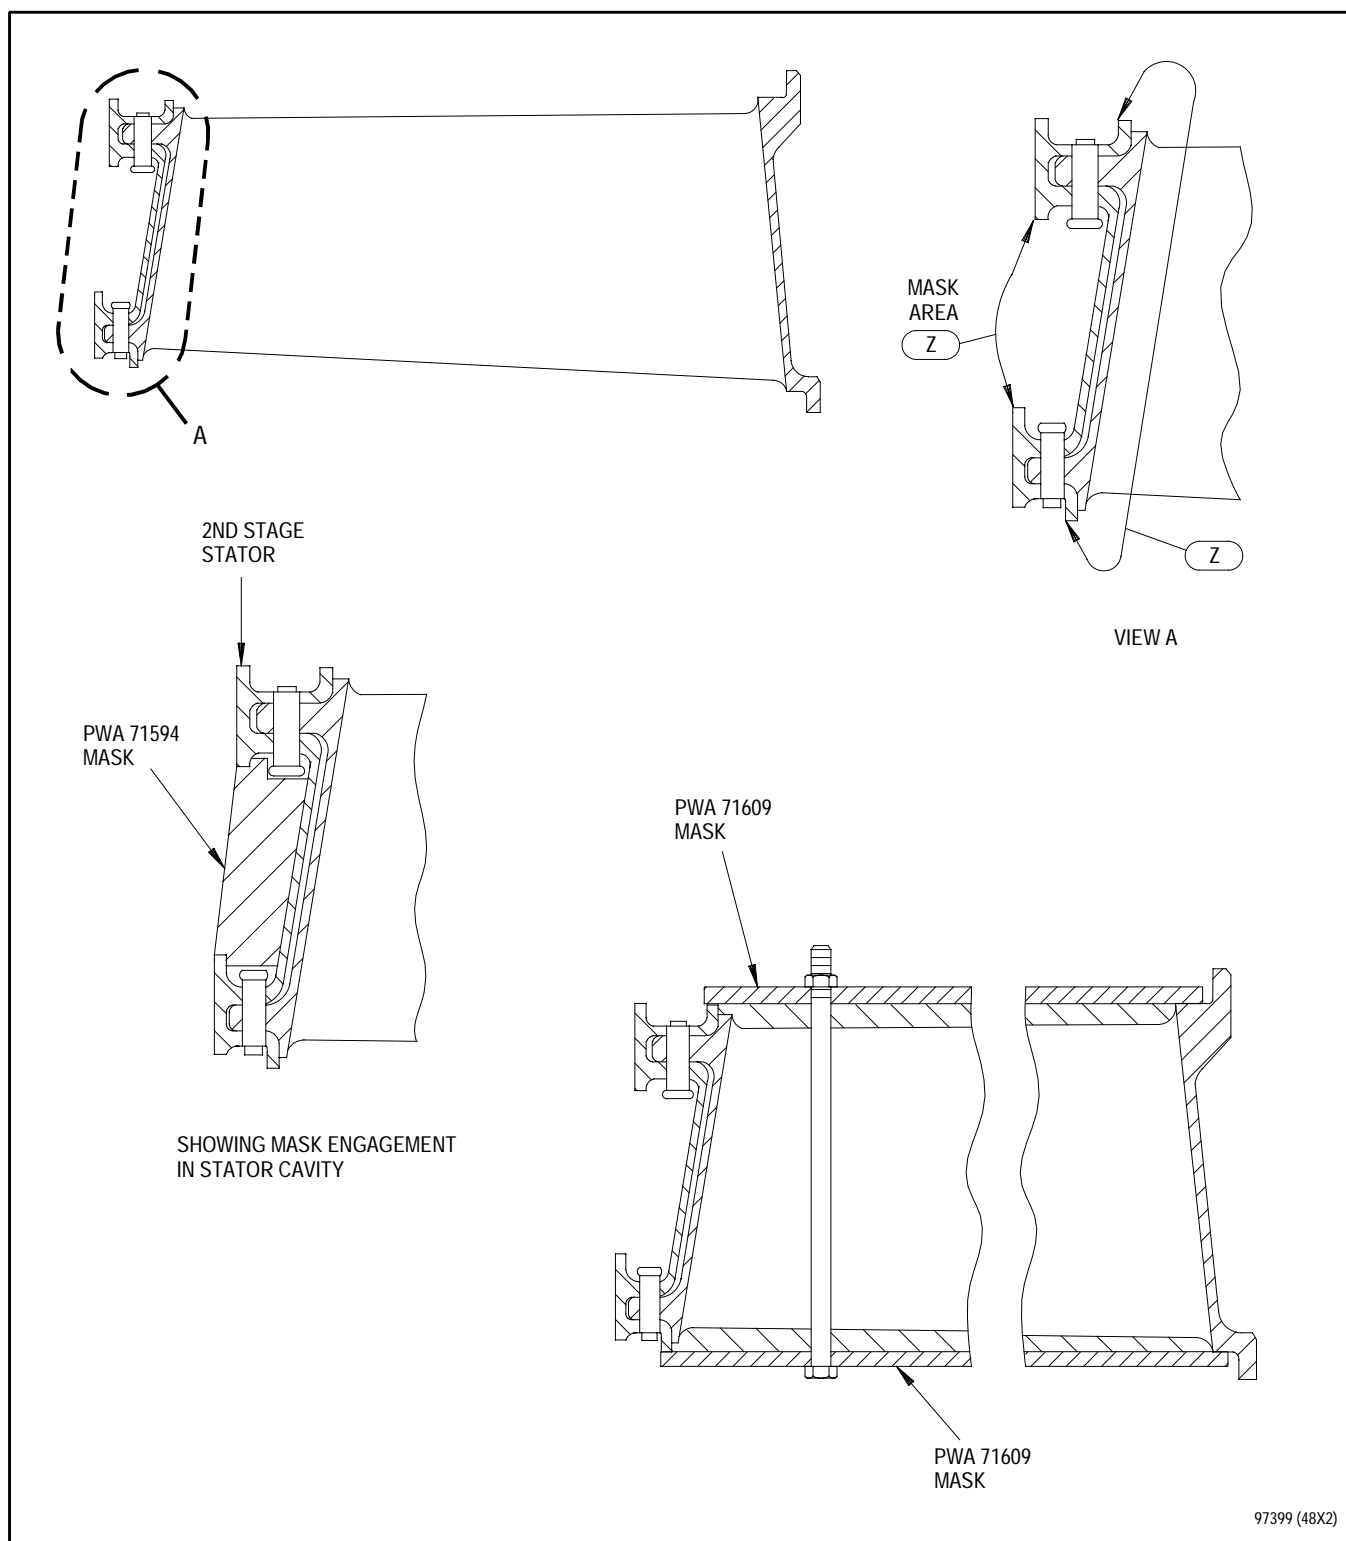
Second Stage Compressor Stator Assembly - Masking Locations for Grit Blast
